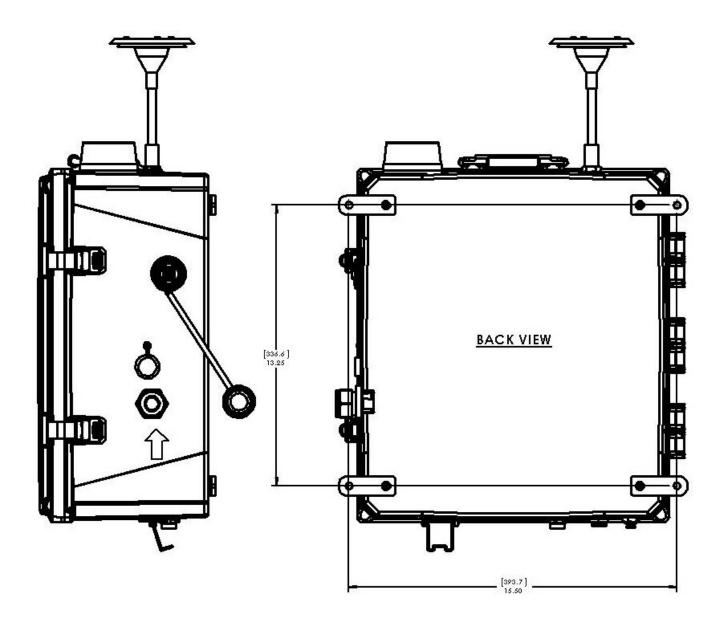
ADR-1500 Horizontal Tab Wall Mount
